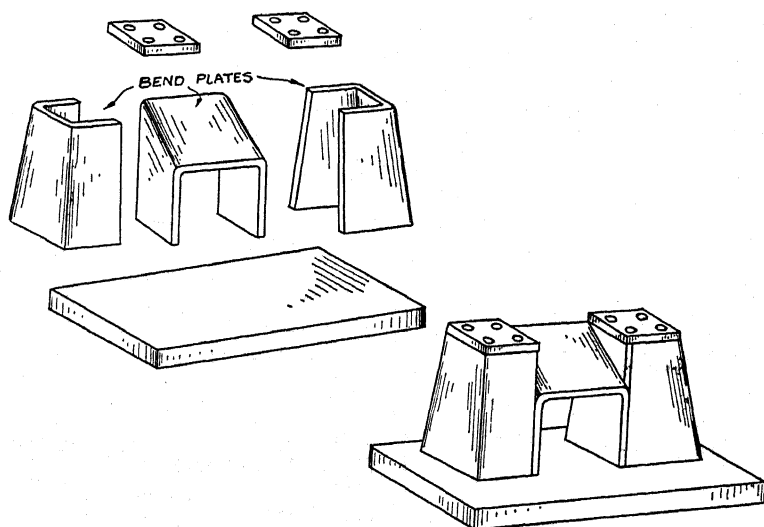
A support for two bearings. Clearance is provided between the supports for a chain drive. The box-like construction gives extreme stiffness. The parts are readily built by bending as shown.
